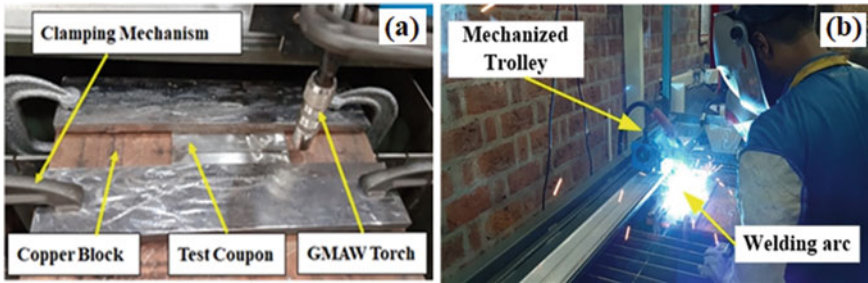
Experimental set up a welding fixture and b welding process
